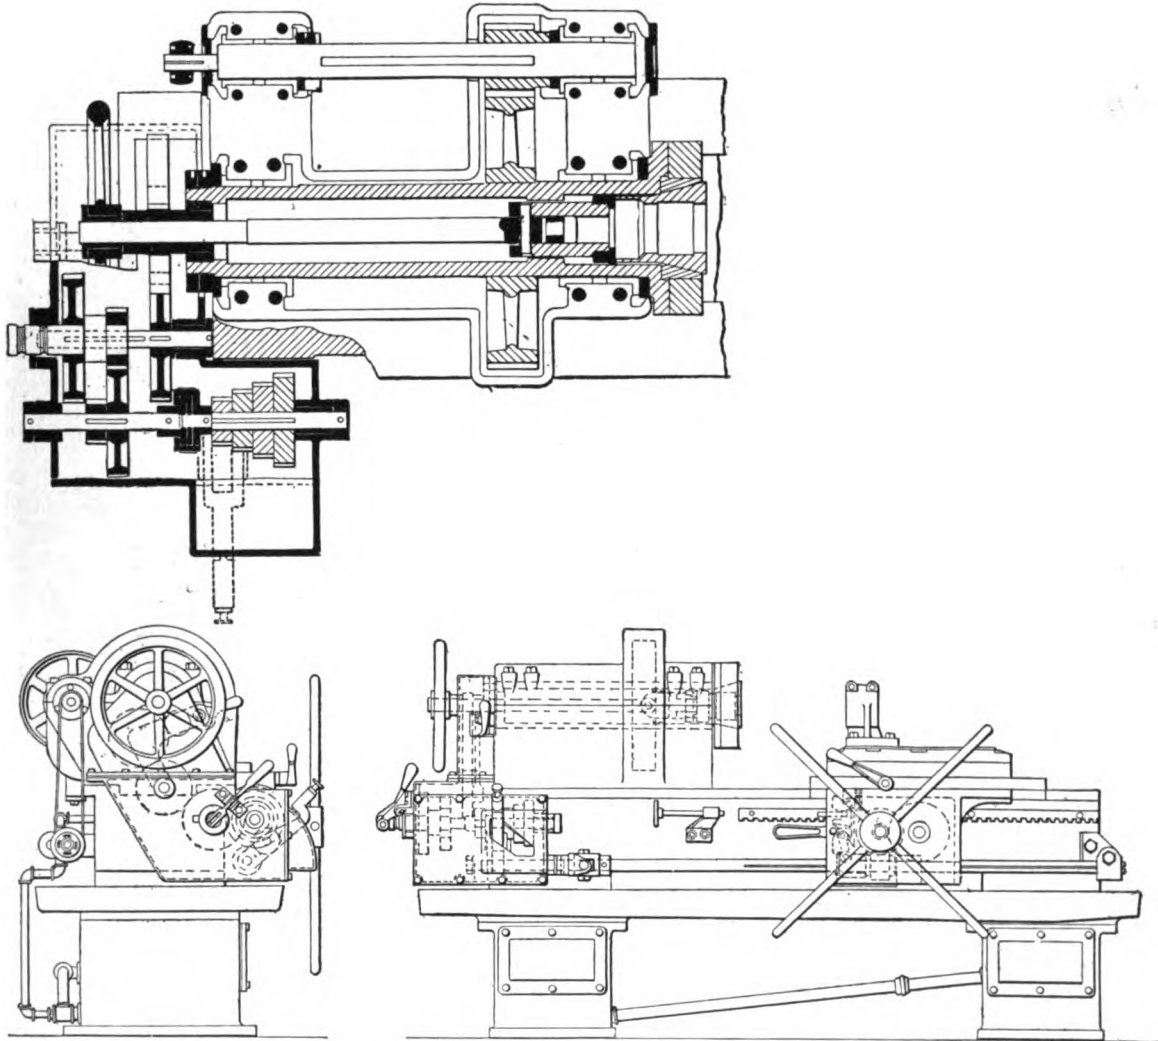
DETAILS OF NO. 3 HEAVY PROJECTILE TURRET LATHE
